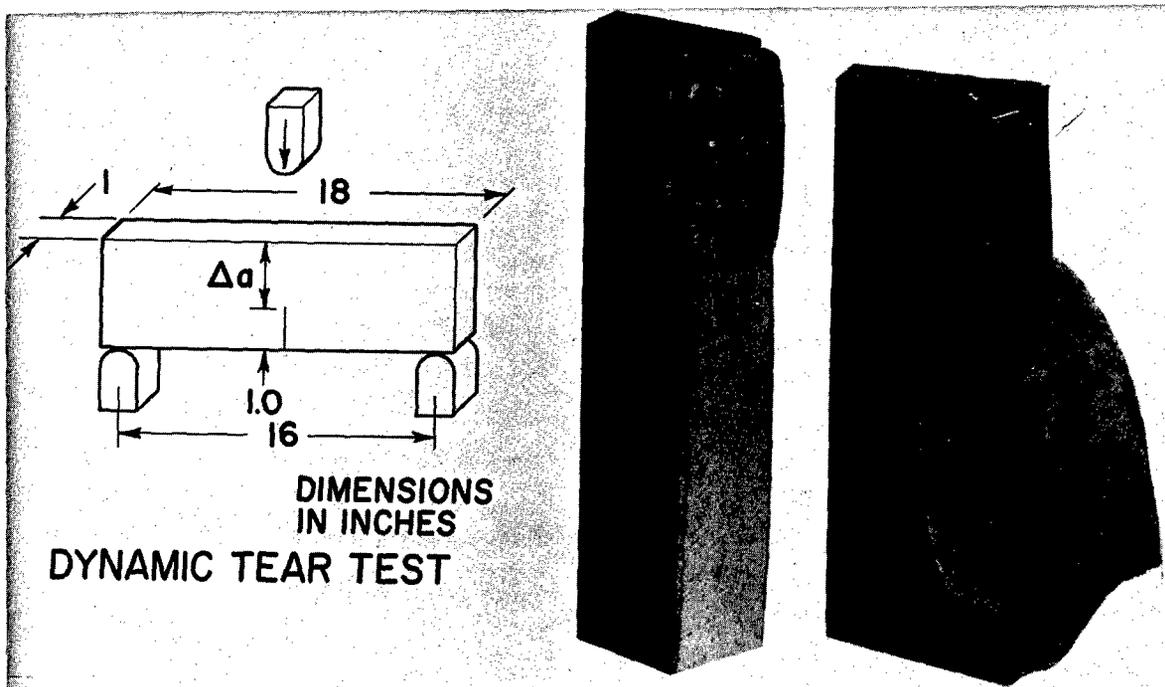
Schematic illustration of 1-in. DT specimen in which the fracture length ( $\Delta a$ ) was varied to define R-curve features. Fracture surfaces of the standard 1-in. DT specimen configuration are illustrated for a frangible (left) and high-fracture-toughness titanium alloy (right).
